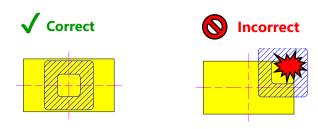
Examples of Correct/Incorrect Nozzle Dimensions
